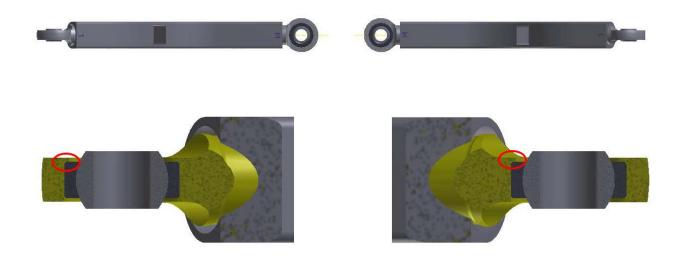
Detail of Left & Right Lateral S.R. (thru spherical bearing) seen from inside dummy
